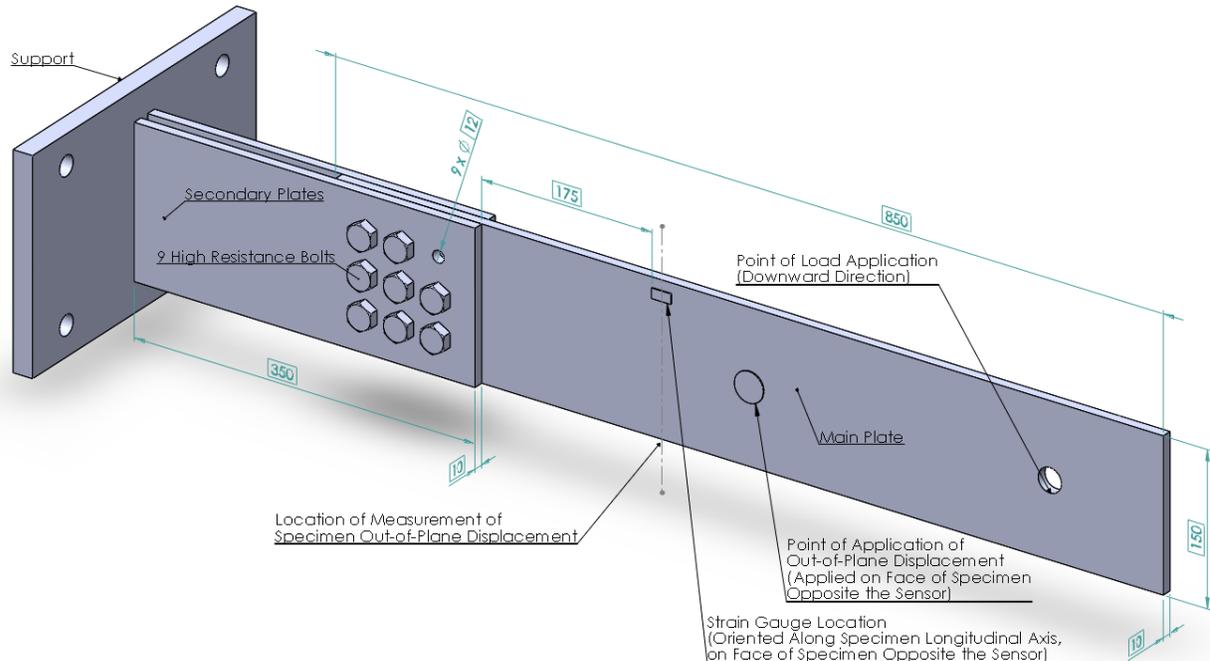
Drawing of the Specimen (Same Side as Sensor)
